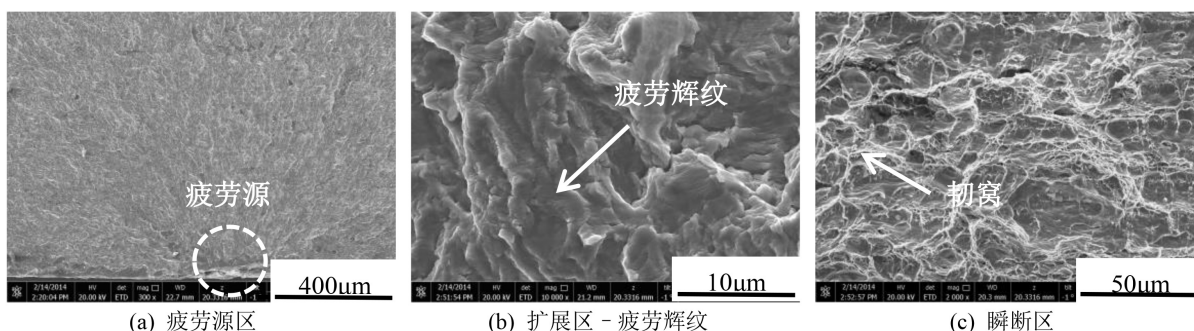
SEM morphology of the fatigue fracture surface of the TIG remelted joint sample
